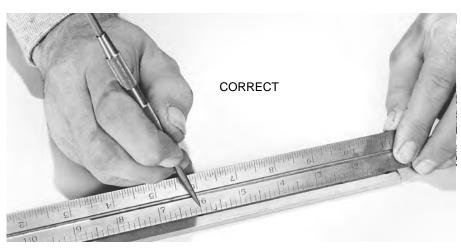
When you work with the scale on edge and the scriber sliding down the groove in the scale, the dimension mark will be a fine point, which is all you need.
